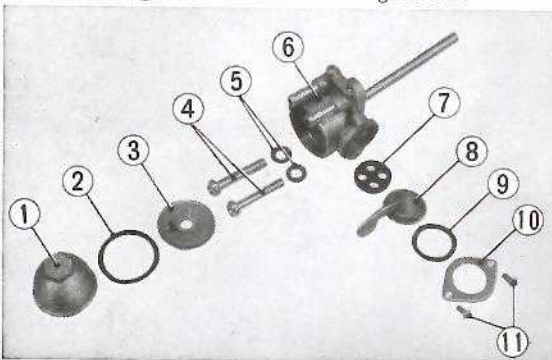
① Fuel strainer cup ② O ring ③ Fuel strainer screen ④ 6mm cross screws ⑤ Fuel cock fixing packing ⑥ Fuel valve body ⑦ Fuel cock valve packing ⑧ Fuel cock lever ⑨ Cock lever spring ⑩ Setting plate ⑪ Cross screws
